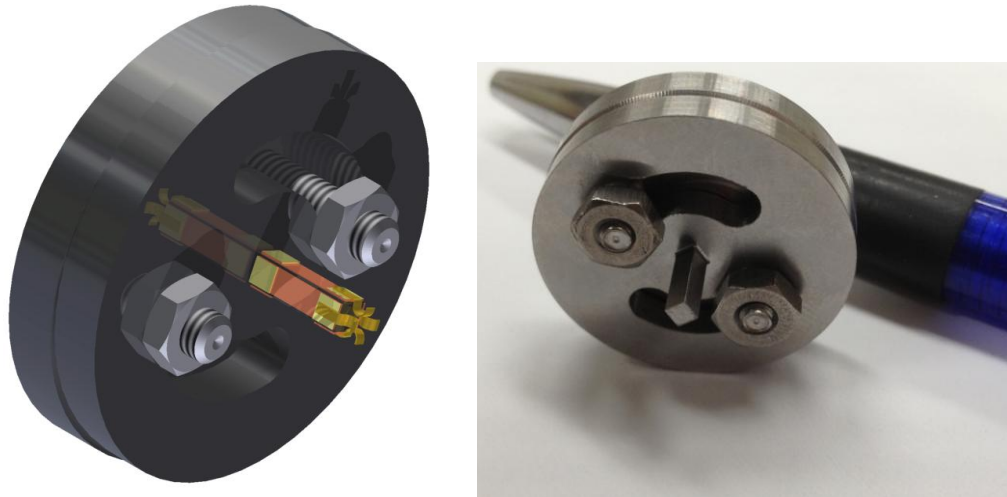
Machined Two-Part Shaker Adapter (right) and Rendered Interconnect Assembly on the Adapter (left)
